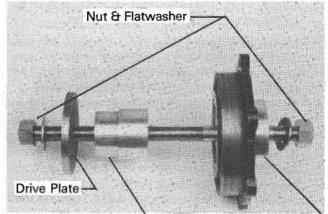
Insertion & Extraction Tool Assembled in Block for Flywheel End Main Bearing Removal
